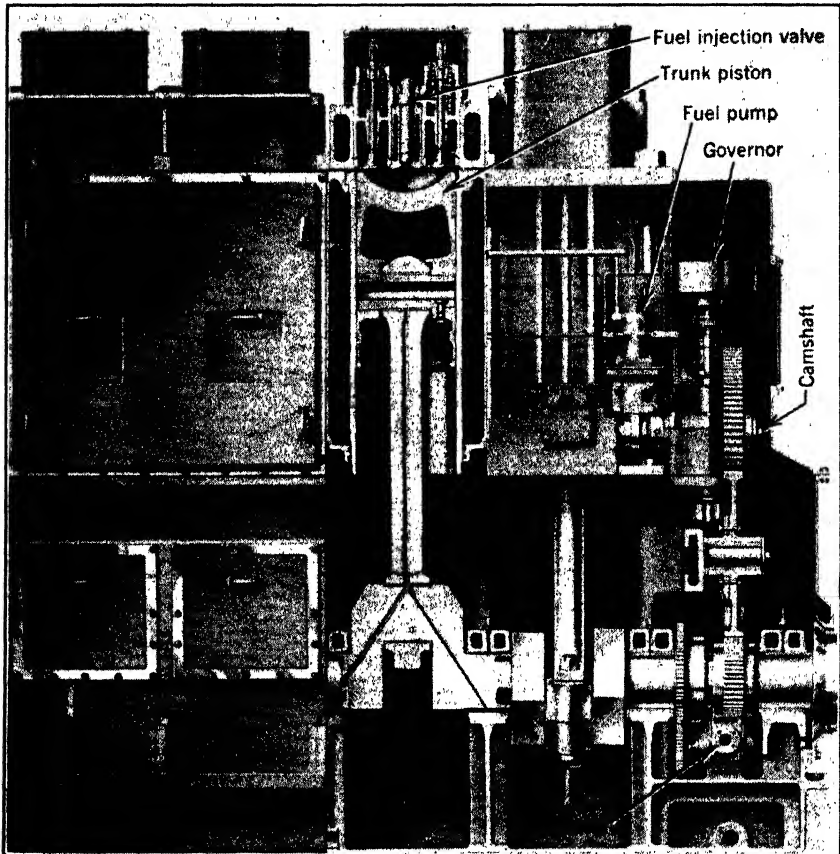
Elevation and section, showing four of six cylinders of a McIntosh and Seymour four-stroke cycle solid-injection Diesel engine.
